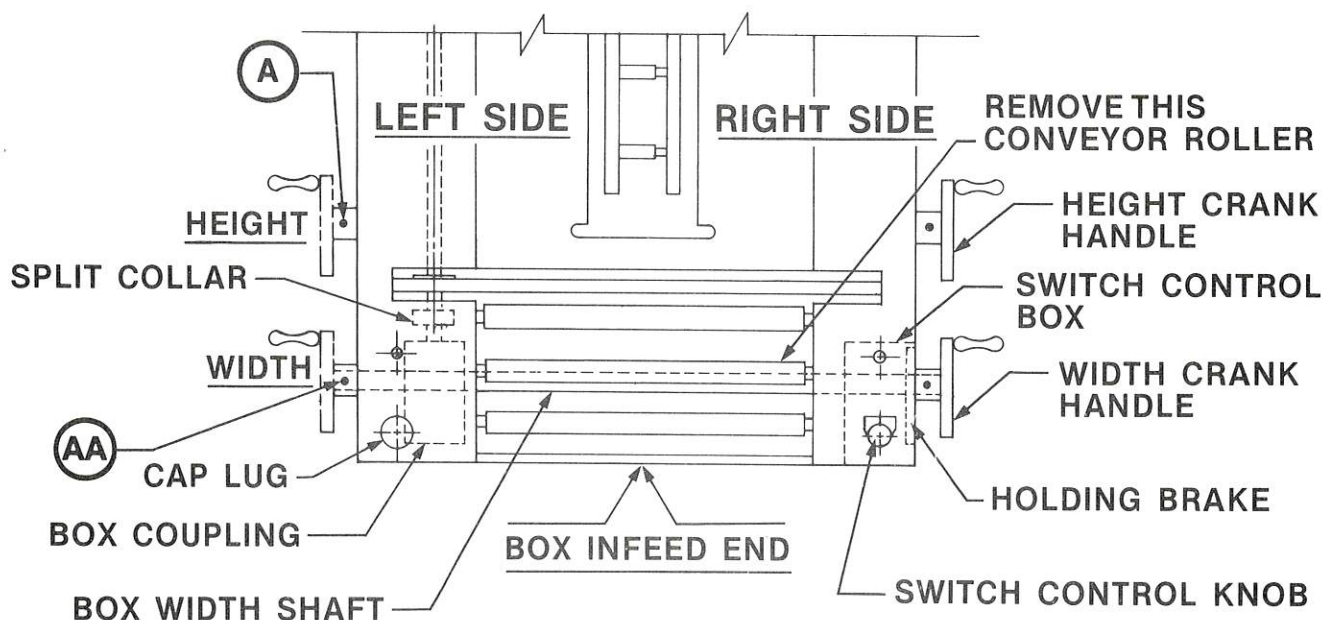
RIGHT - LEFT HAND OPERATION - TOP VIEW
